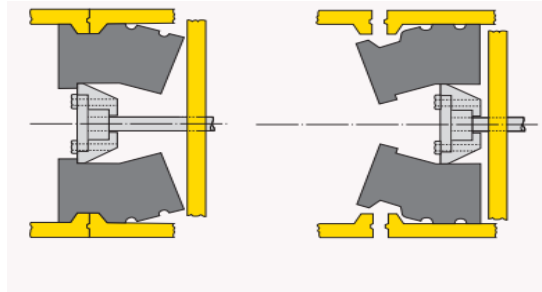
RAR locking mechanism. Figure taken from [25, p. 5]
